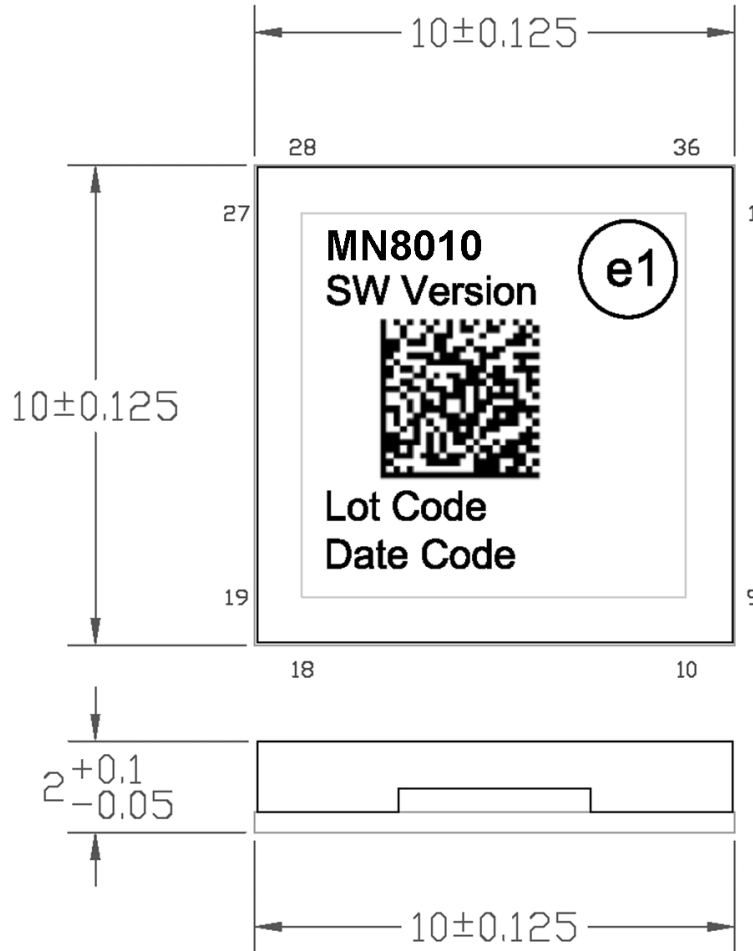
Package Outline & Marking, top view (mm): 36-pin LGA
